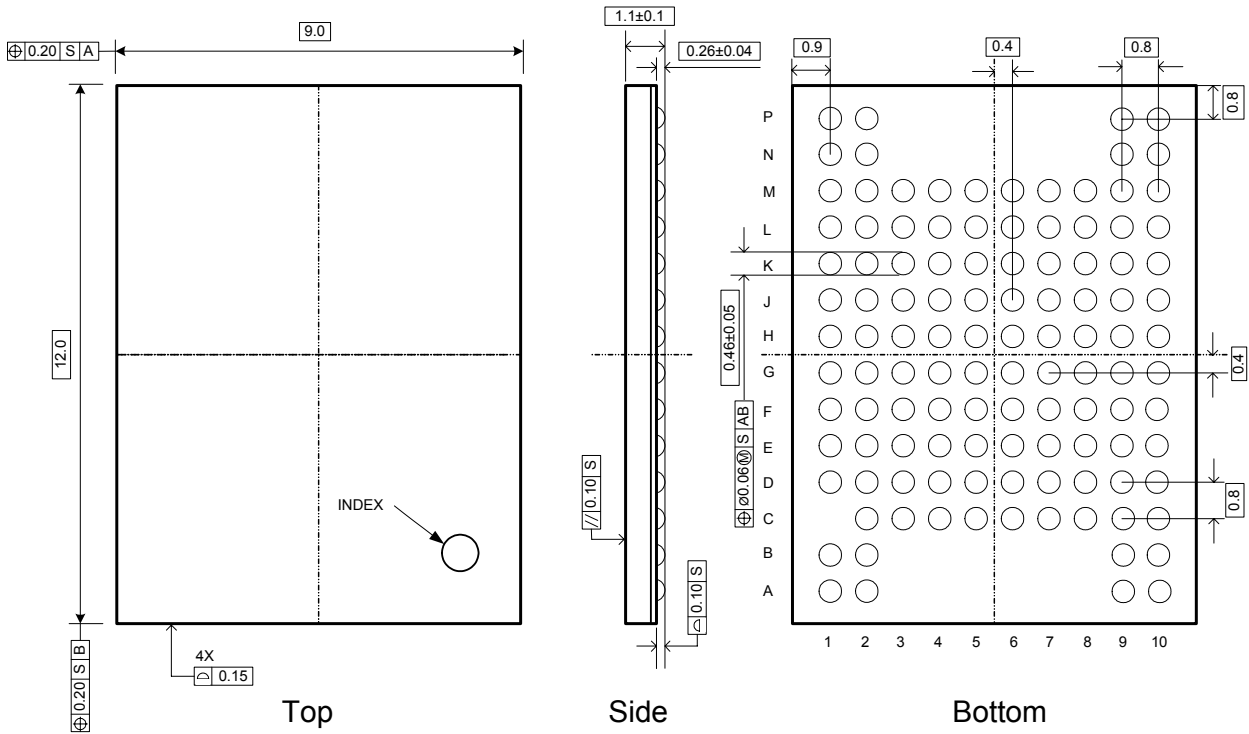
Mechanical Dimensions 9x12 FBGA Package
